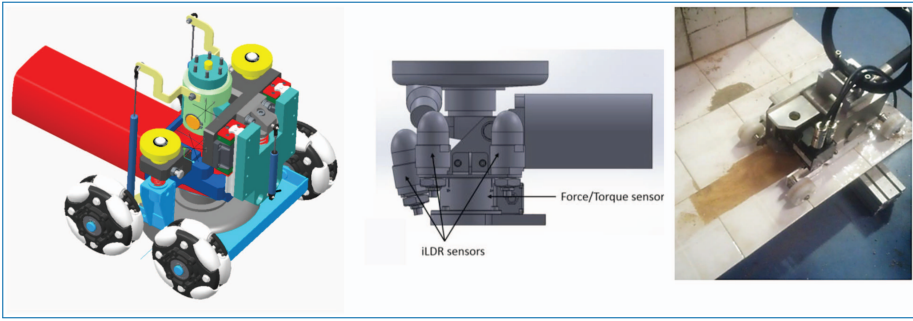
Tools of the Robotic Unit V2: Passive compliance grinder (left), F/T sensor grinder (middle), and Scarifier (right).
